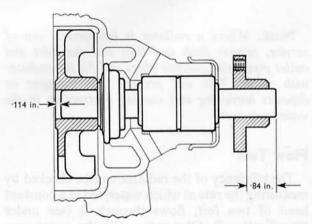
The pulley and rotor must be pressed on to the pump shaft to the locations shown
